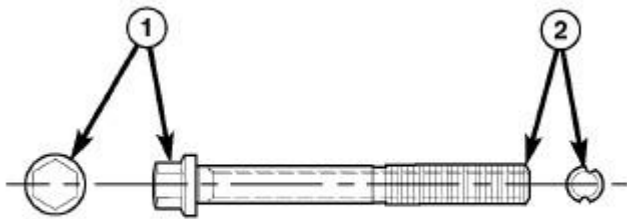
ENGINE CRADLE MOUNTING BOLTS
